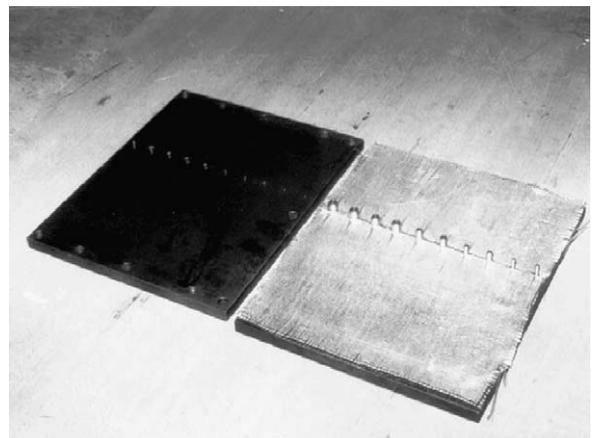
The mould boards and the fiber fabric inserted circular pillars.
